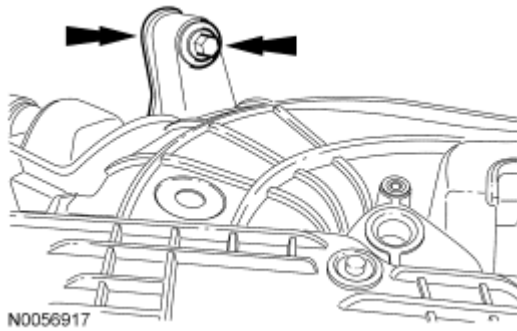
Identifying Upper Intake Manifold Support Bracket & Bolts
